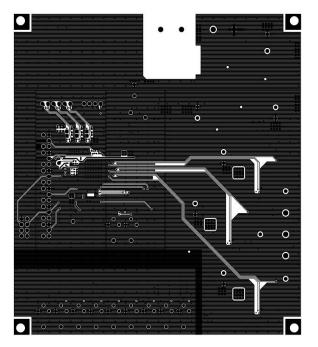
Bottom layer of PCB for Hall Sensor Driver
